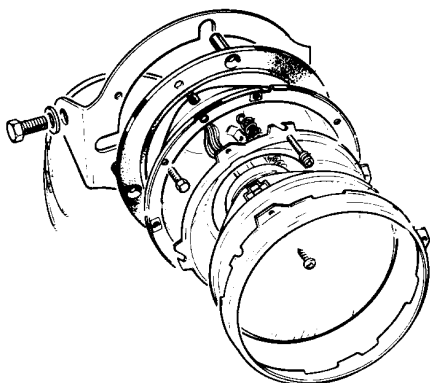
The Headlamp Unit – illustrating the method of mounting the light unit
